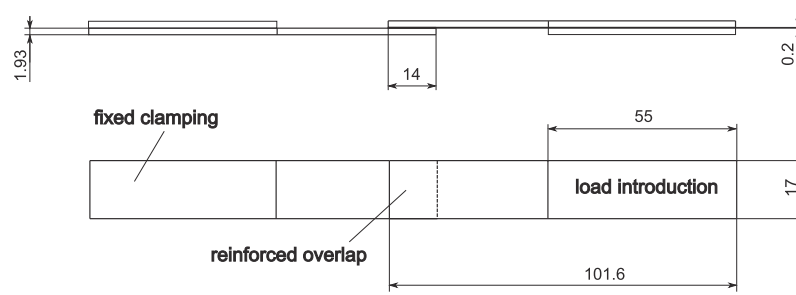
Geometry of the single-lap shear specimen with reduced dimensions.
